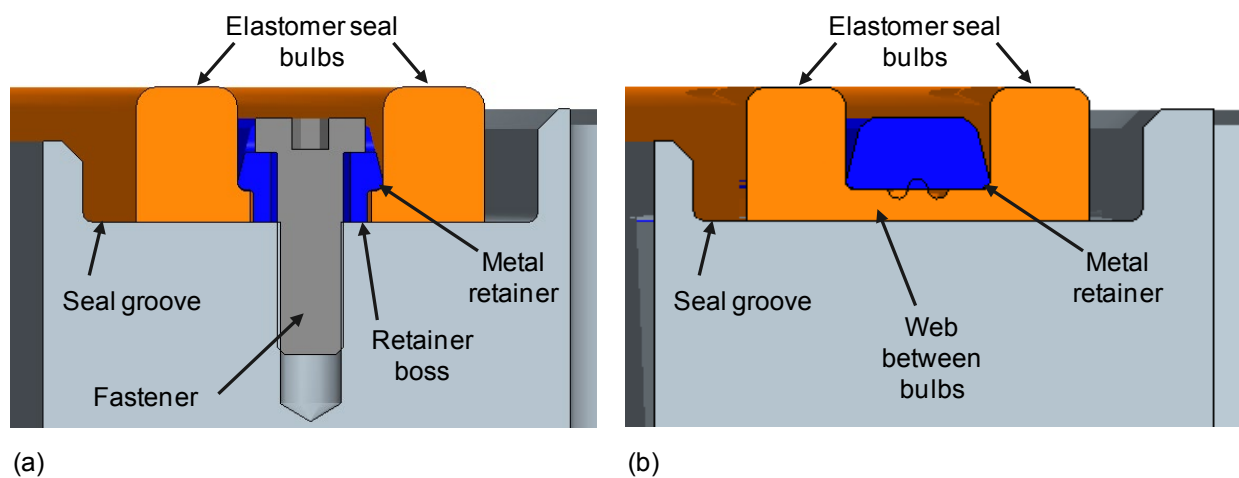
Cross section through multi-piece seal assembly (a) at fastener location and (b) at location between fasteners.
